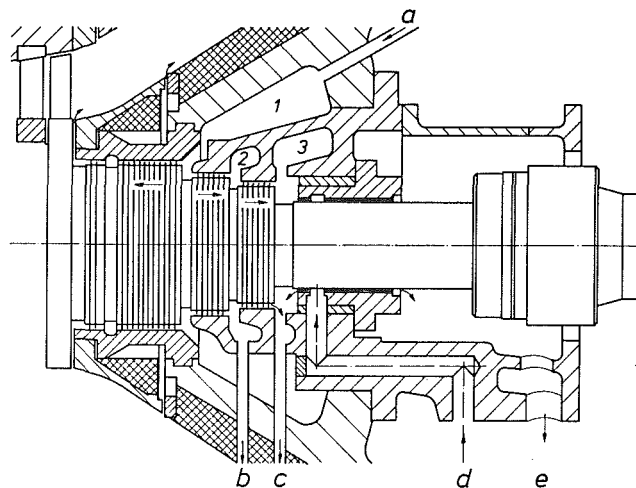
Turbine outlet Geheiz: (a) sealing-air inlet to chamber 1; (b) sealing-air outlet from chamber 2; (c) sealing-air and oil outlet from chamber 3; (d) oil inlet to sealing/journal bearing; (e) oil outlet from sealing/journal bearing
